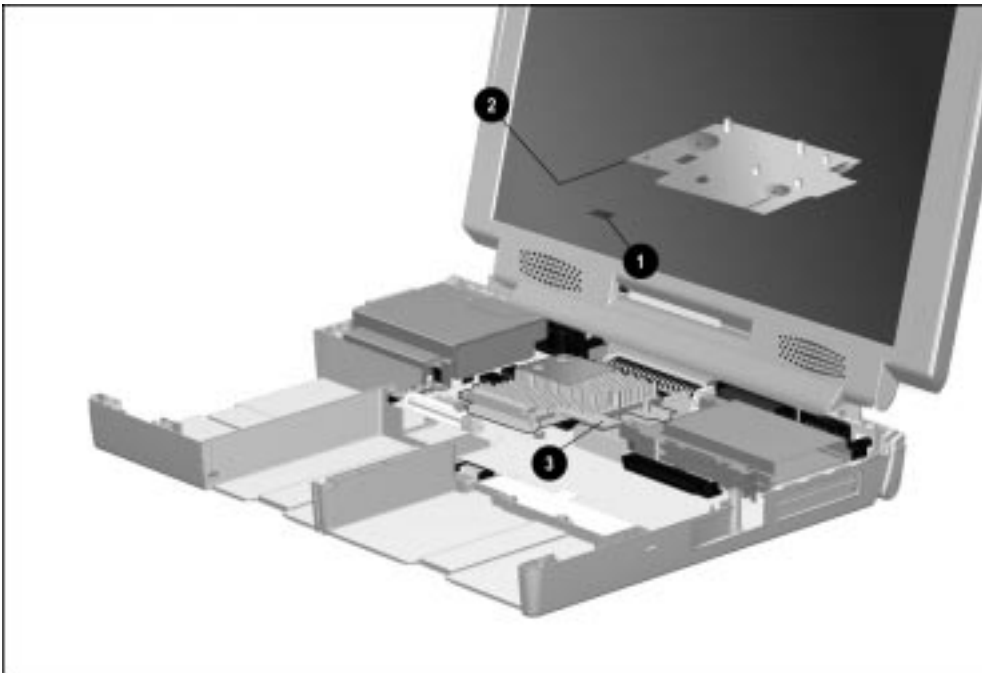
Location of Thermal Pad on the Processor Module Assembly
